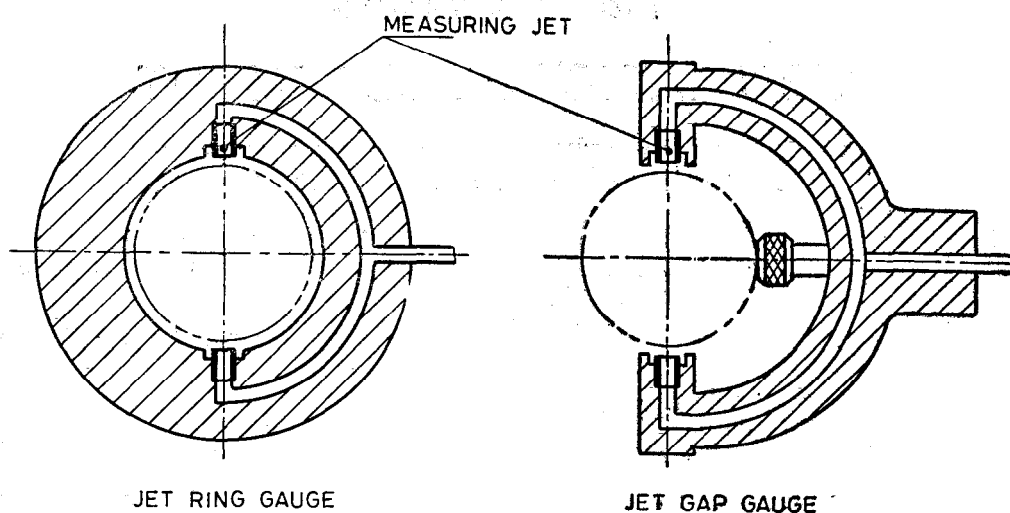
AIR RING GAUGE AND SNAP GAUGE — OPEN JET
